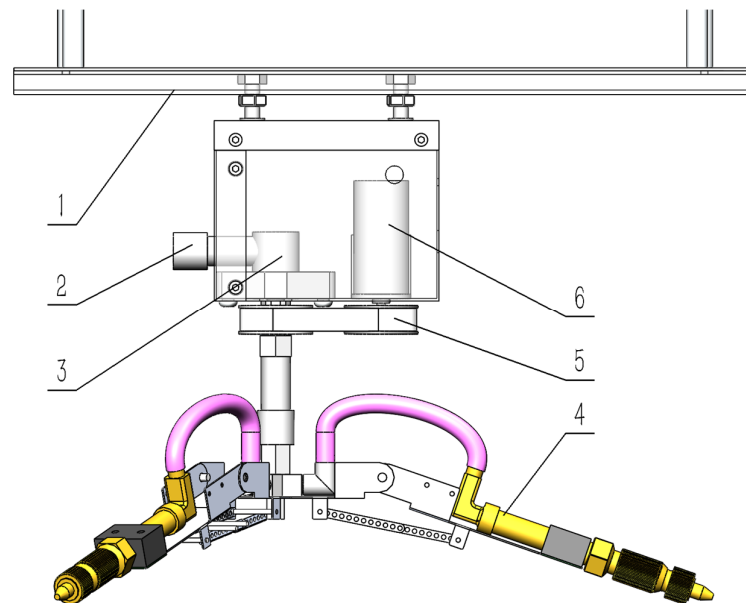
Three-dimensional view of rotating spray nozzle assembly. 1—Track; 2—Water Inlet; 3—High-pressure Rotary Joint; 4—Nozzle; 5—Timing Belt Drive; 6—Small electric motor (speed adjustable).
